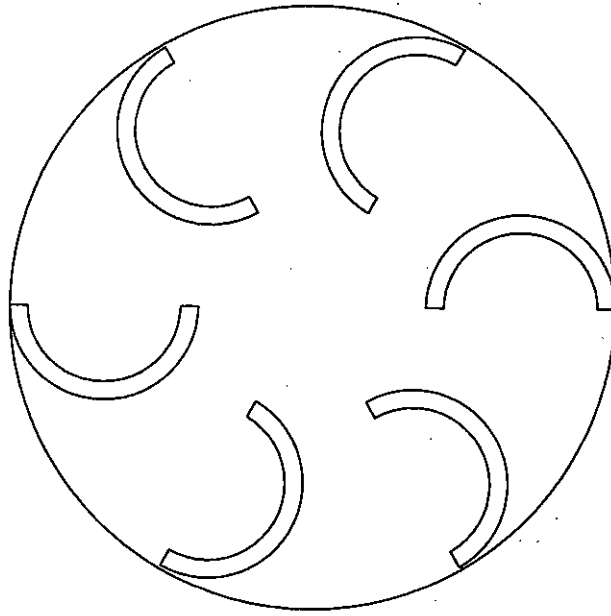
(c): Sectional view of six bladed vertical axis vane type rotor.
